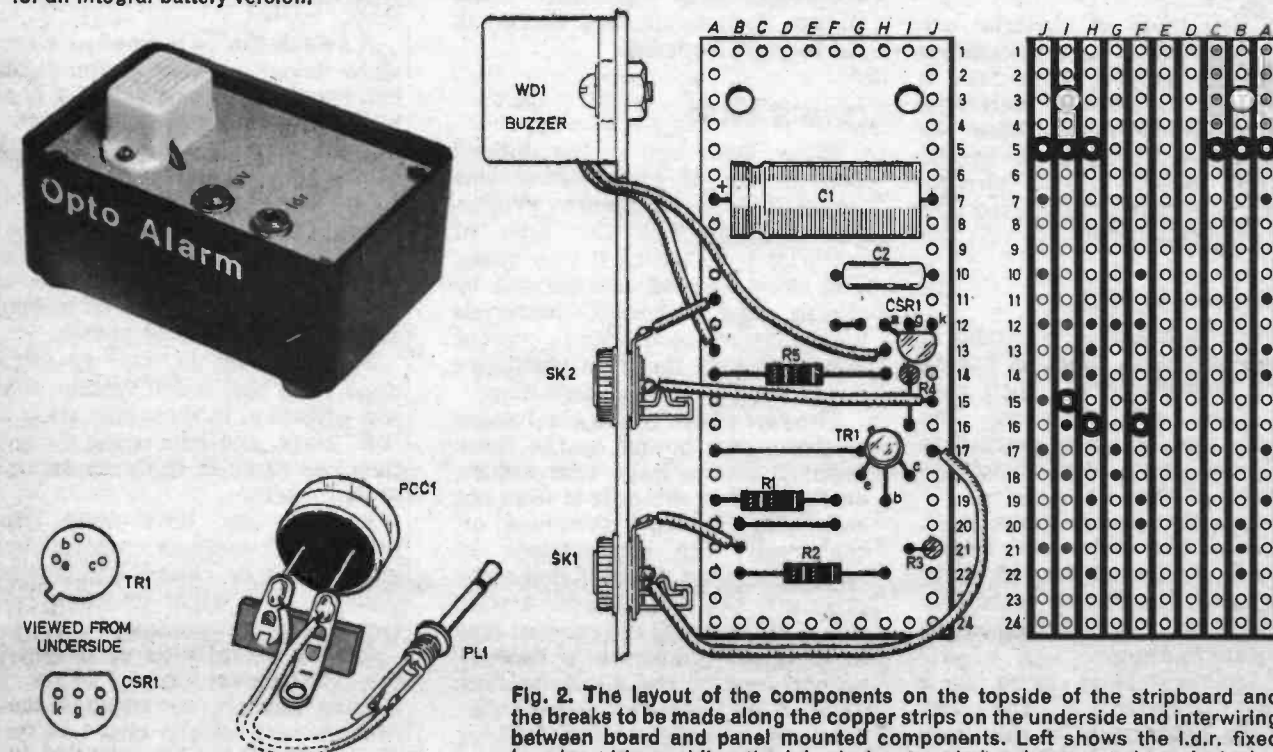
The layout of the components on the topside of the stripboard and the breaks to be made along the copper strips on the underside and interwiring between board and panel mounted components. Left shows the i.d.r. fixed to a tag strip enabling the i.d.r. to be mounted and connected to a jack plug to suit SK1.
